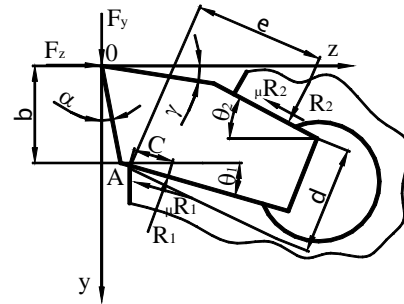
Equilibrium analysis of the clamping system realized due to the elasticity of the tool body.
